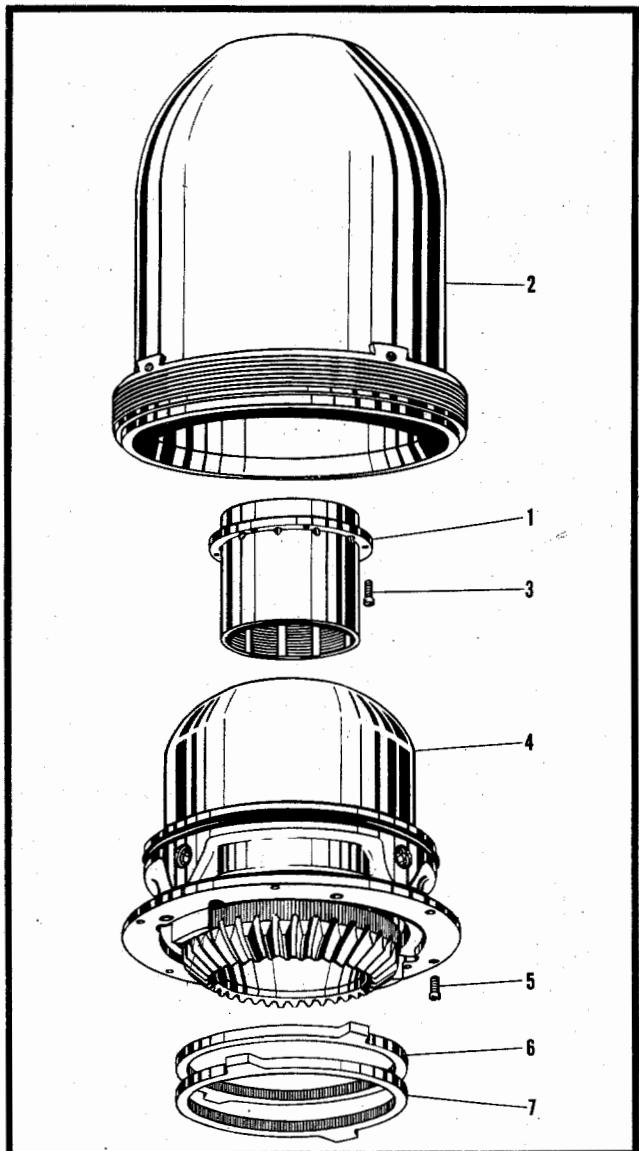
Assembly of Dome Shell onto Piston and Cams
